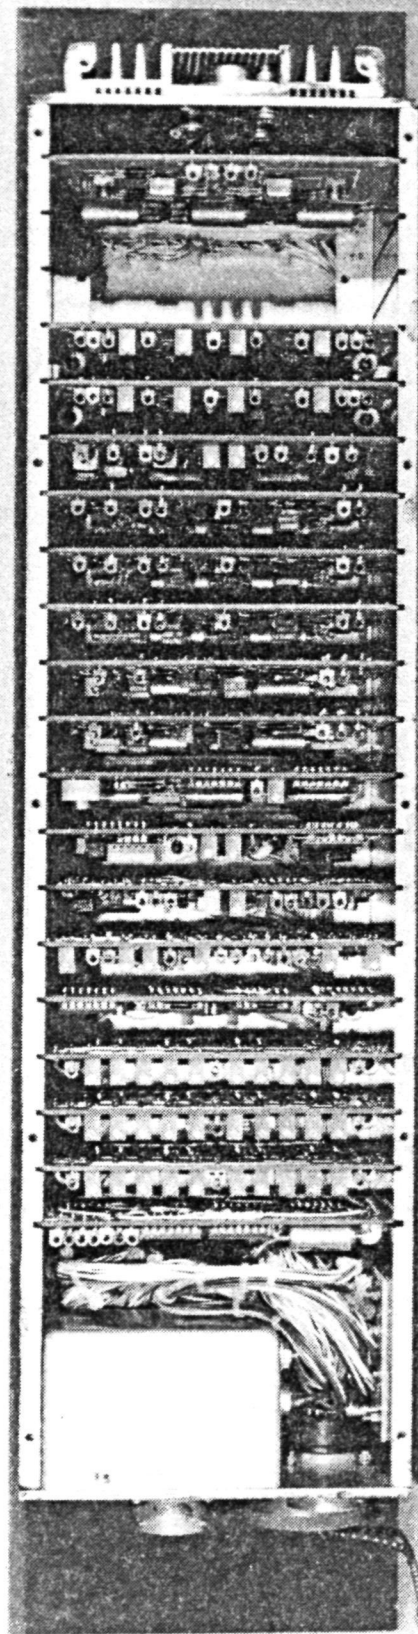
FSS ELECTRONIC BOX TOP VIEW, CIRCUIT CARDS INSTALLED
